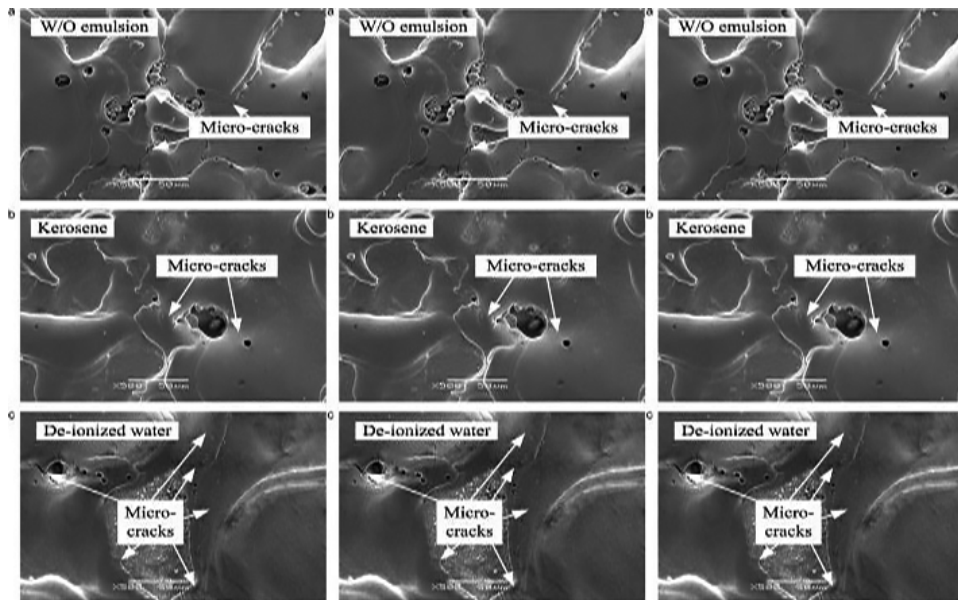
Micro-cracks on samples surface machining in diverse dielectrics
